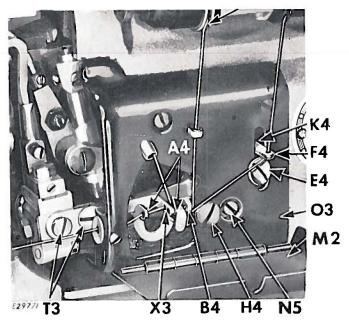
Adjustments on Take-up for Two Thread Stitch and Three Thread Tight Needle Thread Stitch
